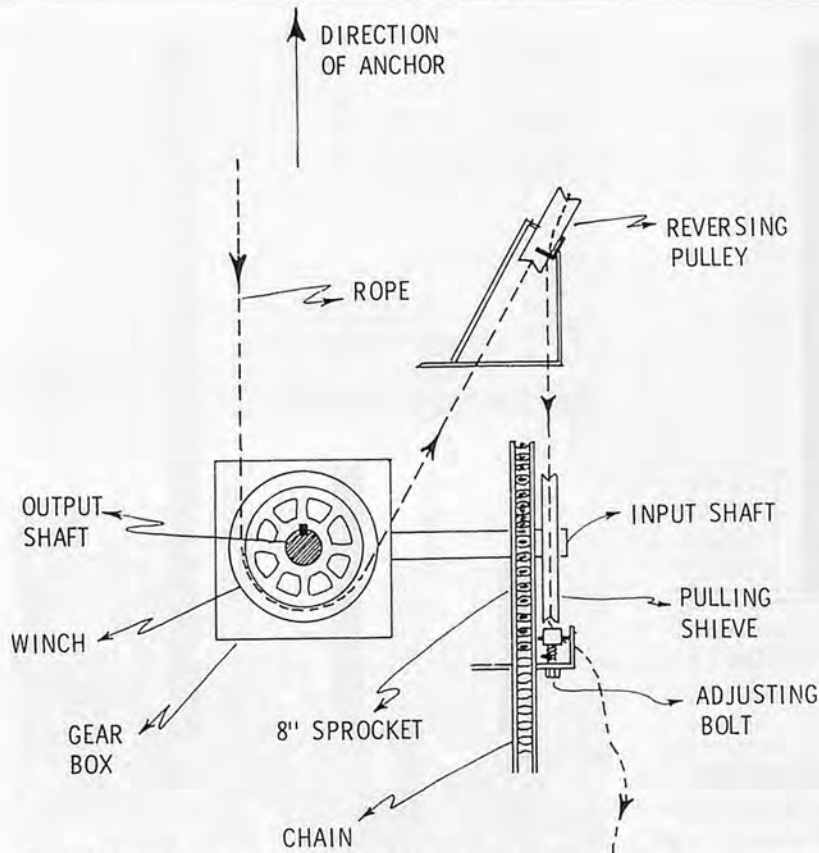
A sketch showing the method used to reverse the direction of the rope leaving the winch assembly.
